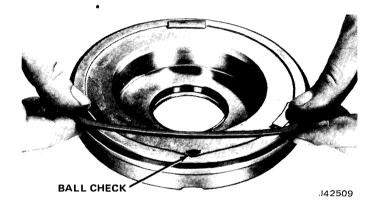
Installing Outer Seal on Direct Clutch Piston
